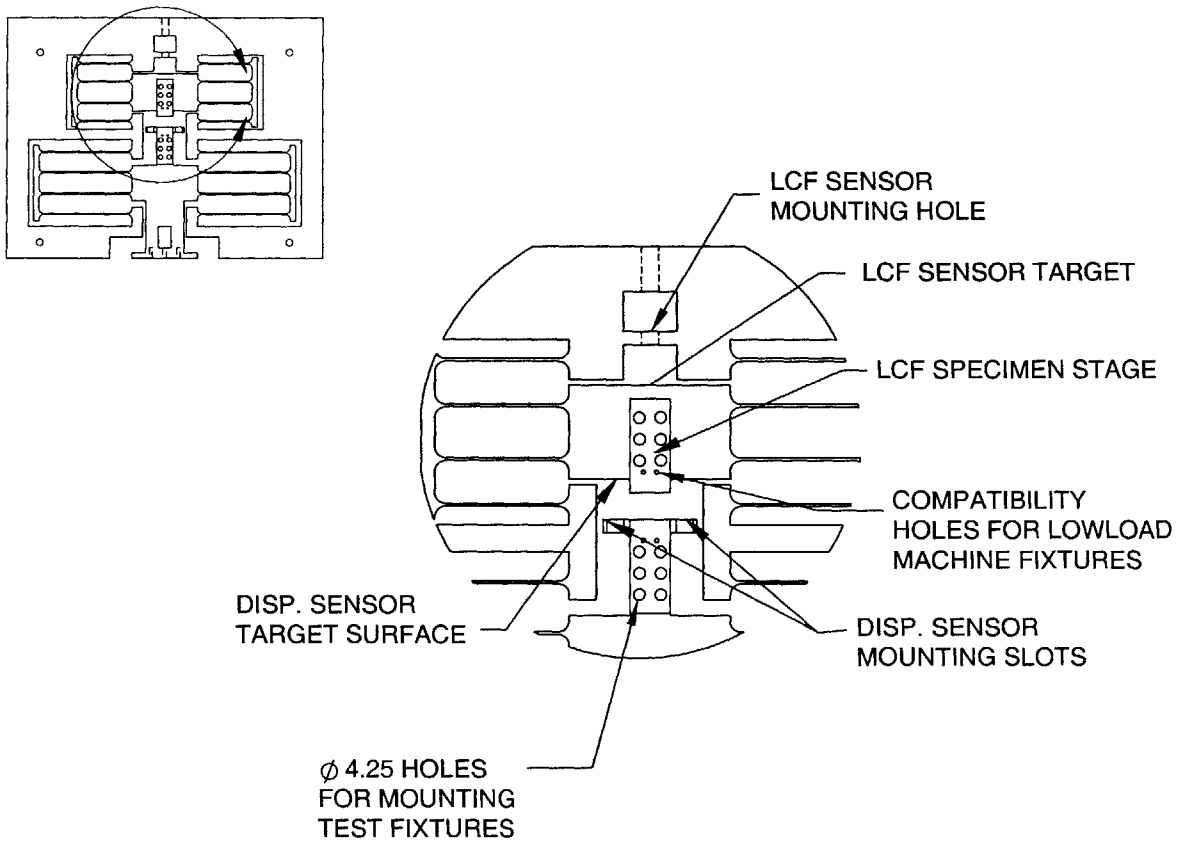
Close-up of the specimen stage region in the high load testing machine.
